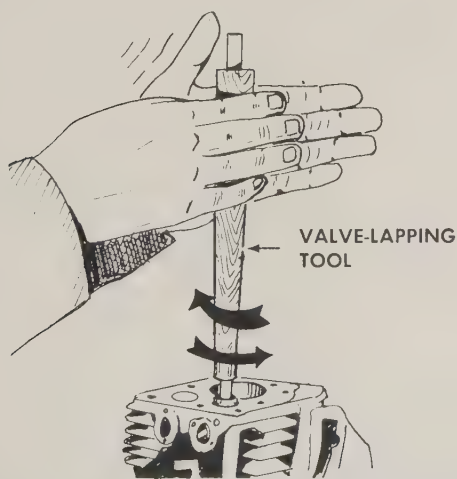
Using a valve-lapping tool to improve fit of valve to seat.
